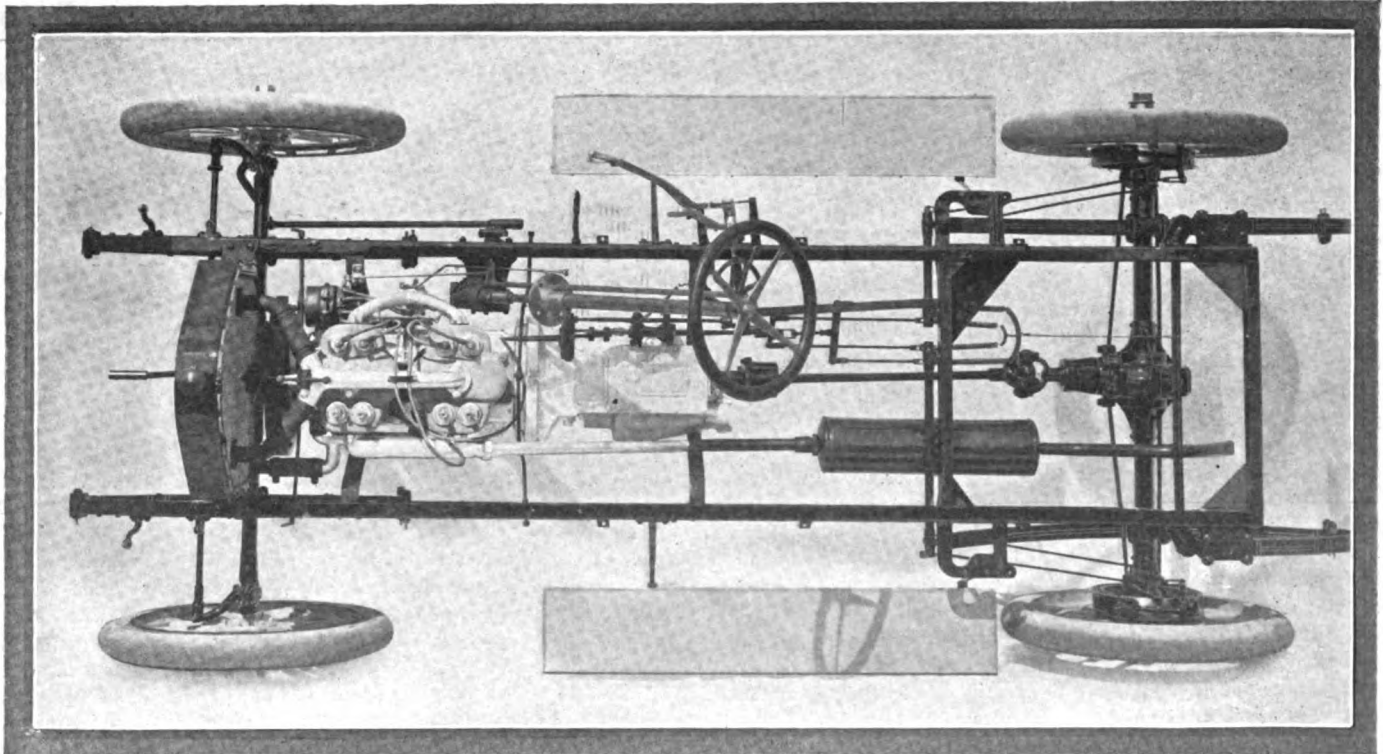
Plan view of the Maxwell Mascotte chassis, showing the assembly of the motor with its three-point suspension and other details
